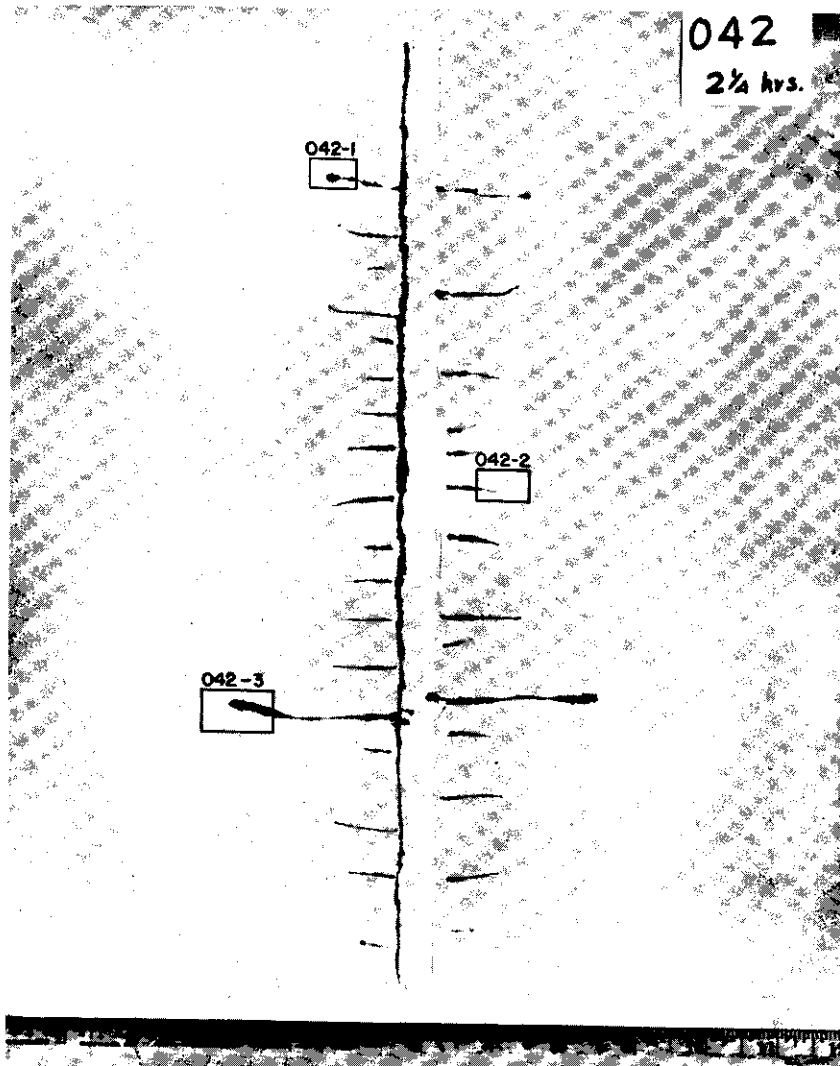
Crack pattern after hydrogen-induced-cracking test for 2-1/4 hours. Specimens 042 - 1, 042 - 2, and 042 - 3 were taken for metallographic examinations of fracture surfaces.
